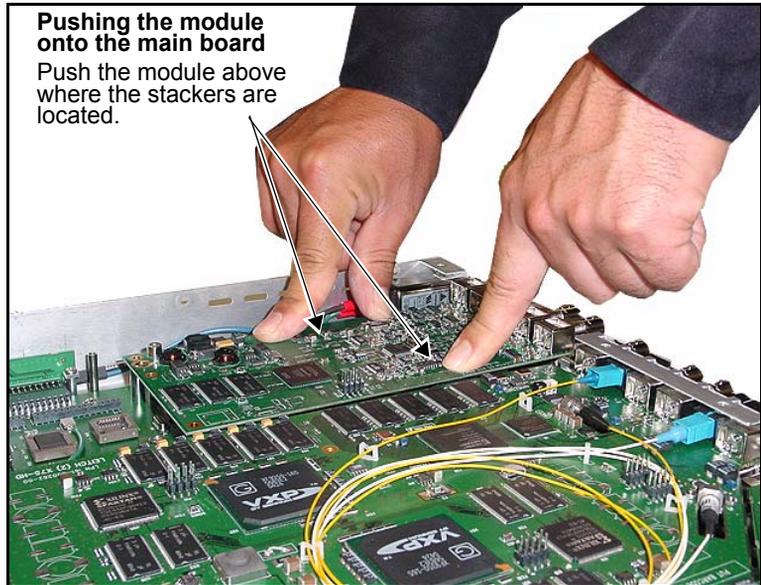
Pushing the Module on to the Main Board (X75 Shown)
